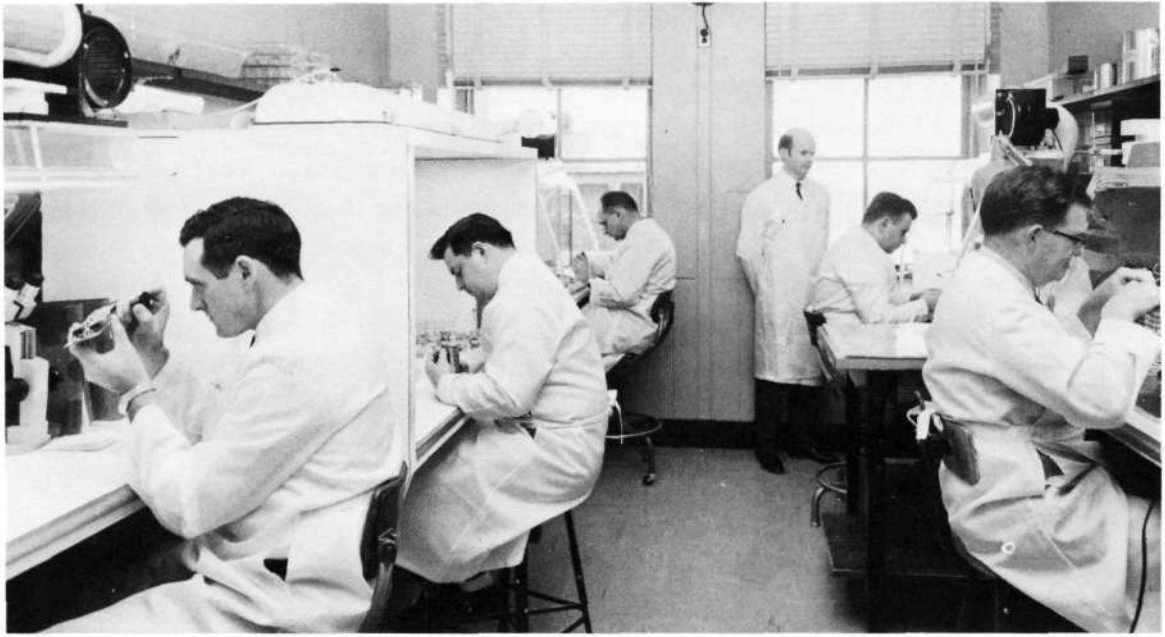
IMP-F and -G Experiments, Flight-Hardware Assembly Room
